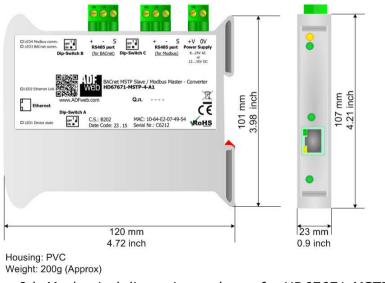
Mechanical dimensions scheme for HD67671-MSTP-4-A1
